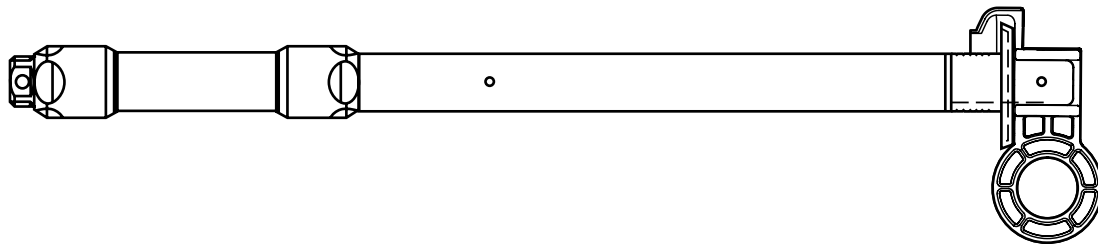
Inner holder with fuse link, cartridge and end plug assembly.
